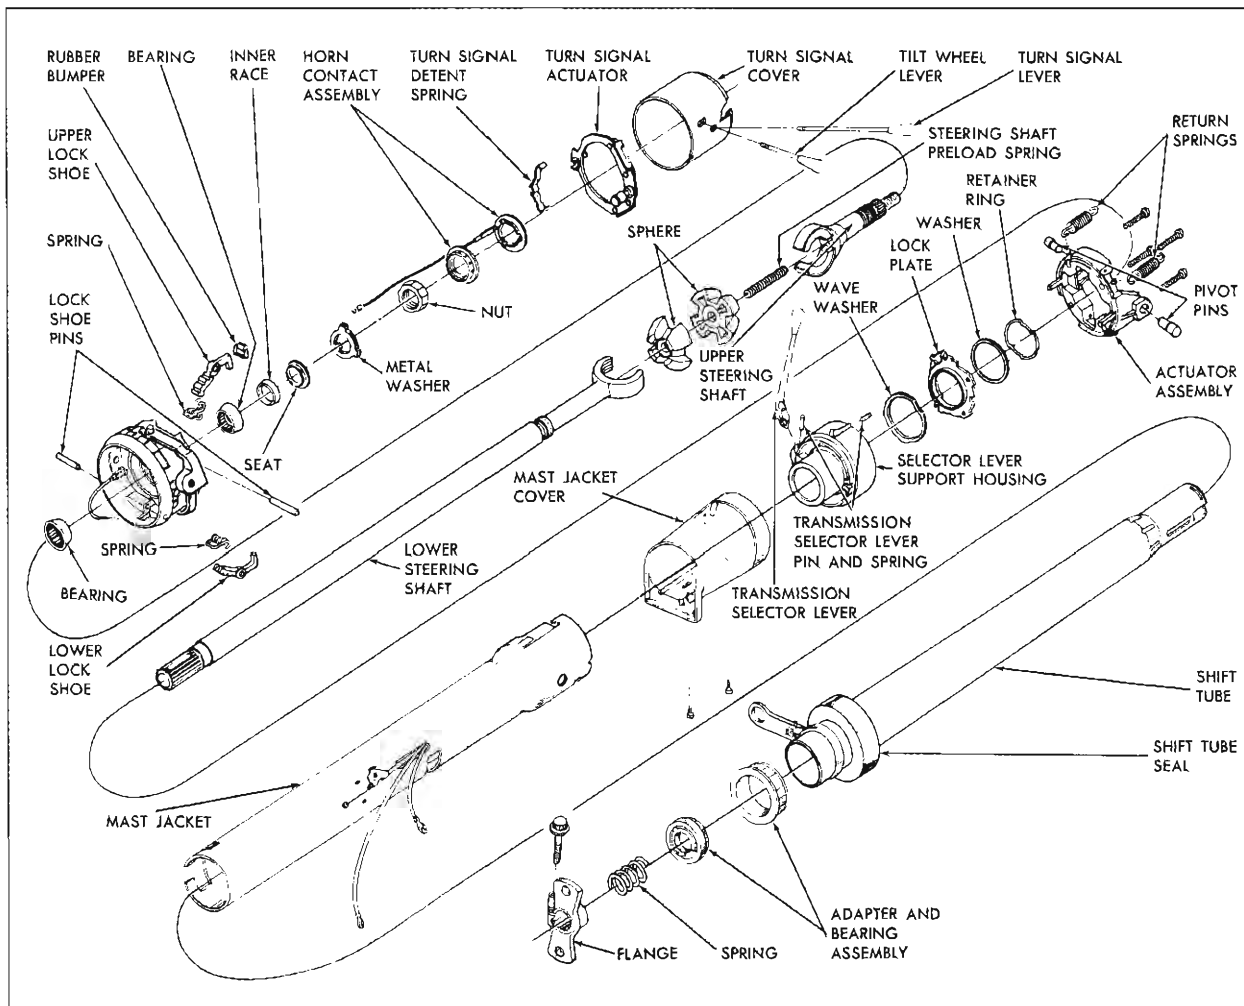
Exploded View of Tilt Wheel Steering Column (as used with Powerglide)
